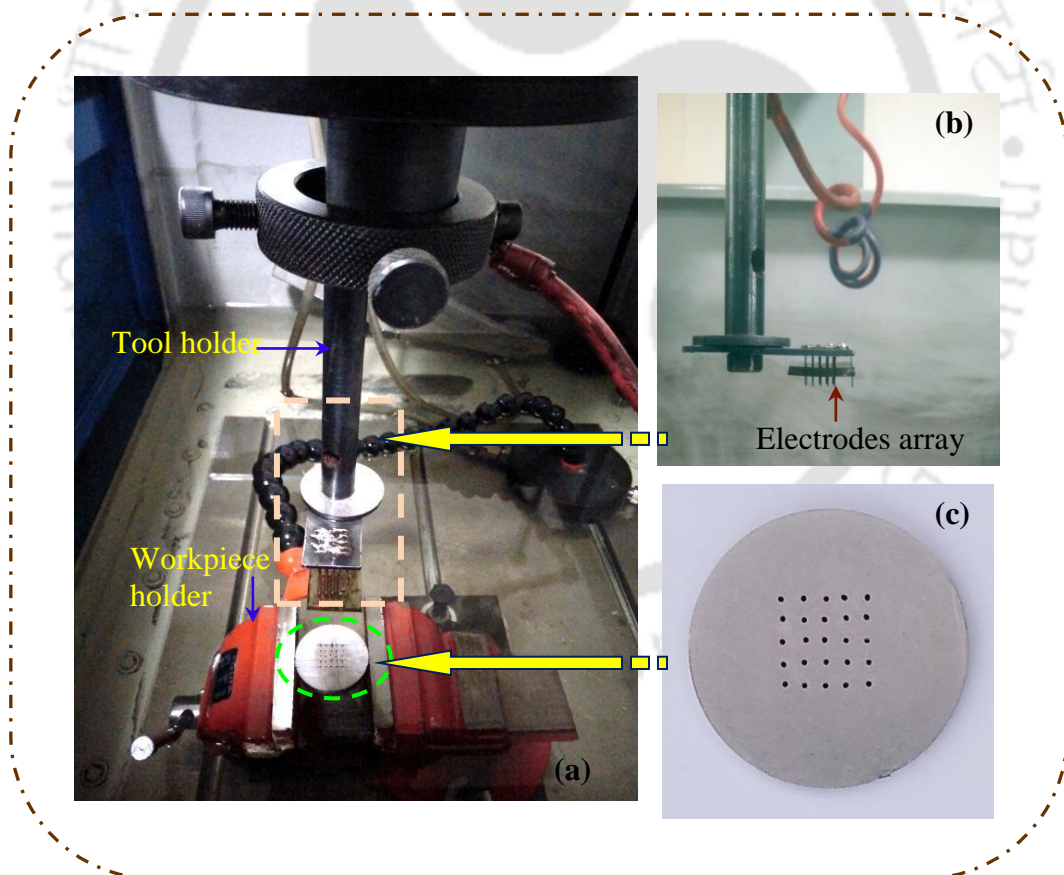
(a) Overview of electric discharge micromachining setup and tooling used for machining microholes (b) tooling (c) micromachined workpiece.
